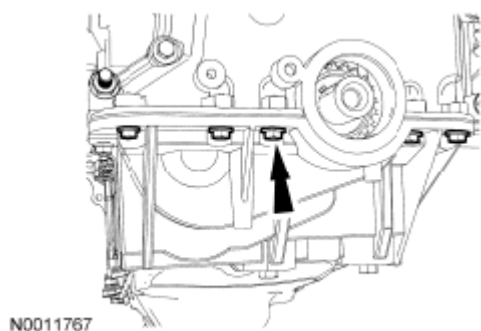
Locating Cylinder Block Cradle-To-Engine Front Cover Bolts
